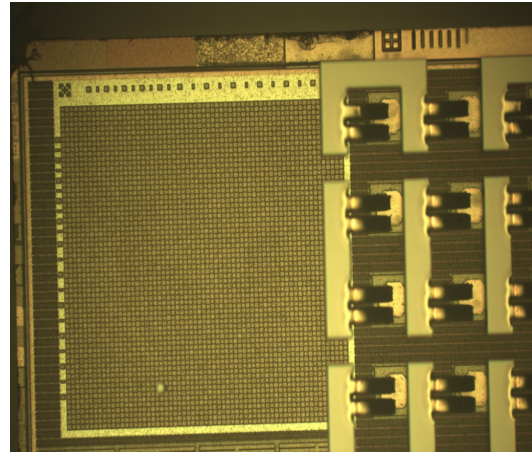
Top view image of spring tips aligned and assembled to the IC pad chip. In this practice assembly the springs were first fabricated on the glass substrates, enabling visual inspection. The springs are misaligned by $15\text{-}20 \mu\text{m}$ in the y-direction, causing one of the two tips to land outside of the pad window, which should increase the total resistance by $<10\%$.
